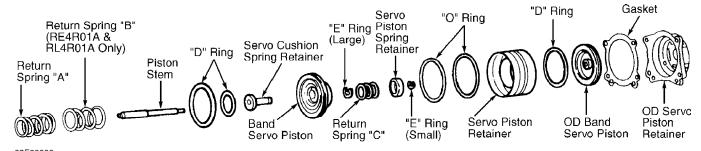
Exploded View Of Band Servo Piston Courtesy of Nissan Motor Co., U.S.A.
